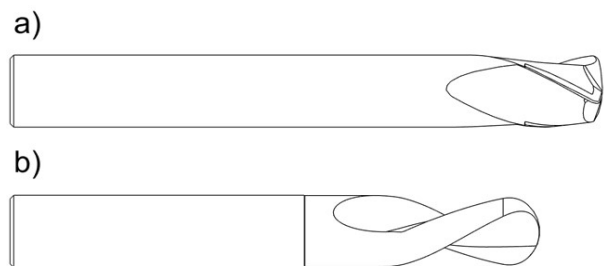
Tools used for tests a) lens-shape end mill EMUGE FRANKEN 3544L.10020A b) ball end mill Sandvik Coromant R216.42-10030-AC19P 1620
